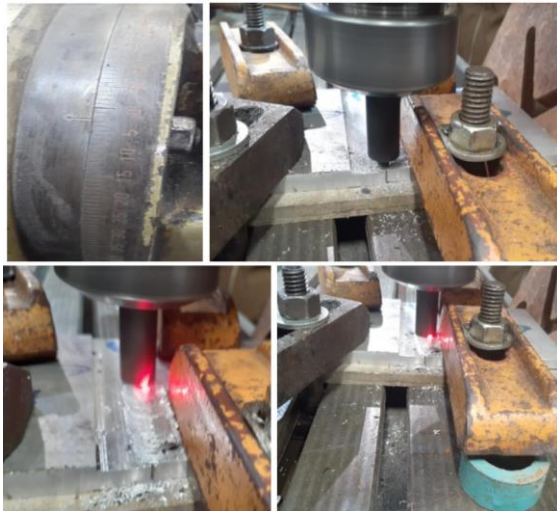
It shows the method of fixing the alloys, calibration and the welding process from starting to end
